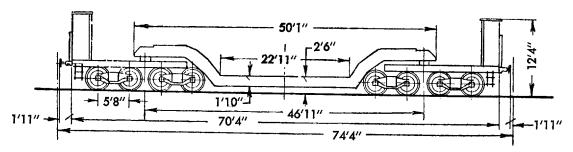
Sketch of an eight-axle transporter with a capacity of 70 metric tons (1933 model). This car has a brakeman's cabin on each end and is equipped with both hand and pneumatic brakes.
